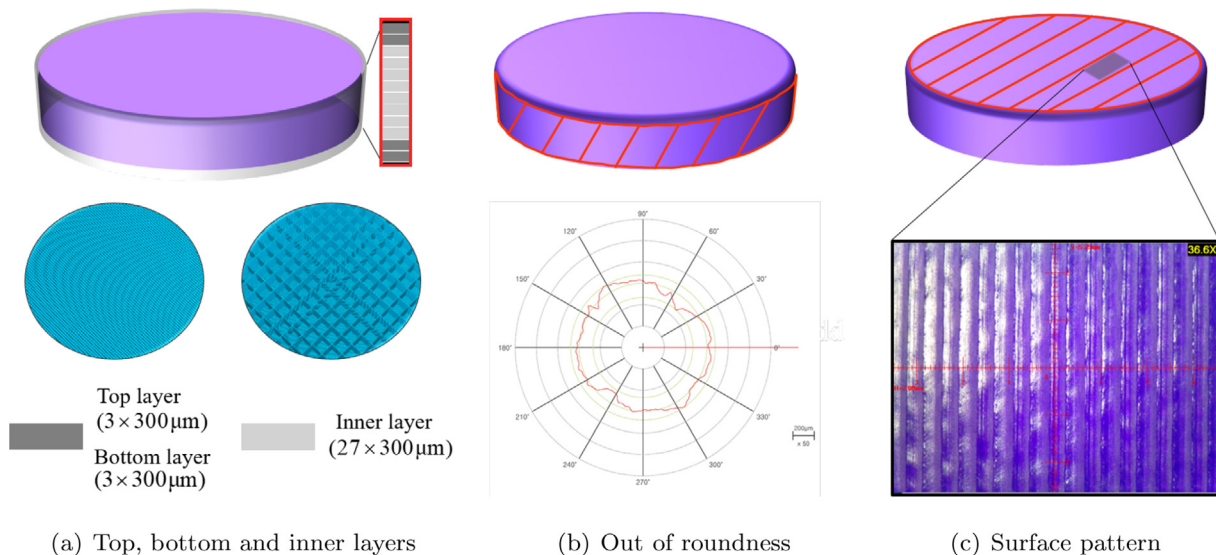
Manufacturing of adaptive acoustic absorber. (a) A circular plate and the top layer, the bottom layer and the inner layer and (b) the measurement of the out of roundness (NITECH.CO.KR) and (c) surface pattern of circular plate.
